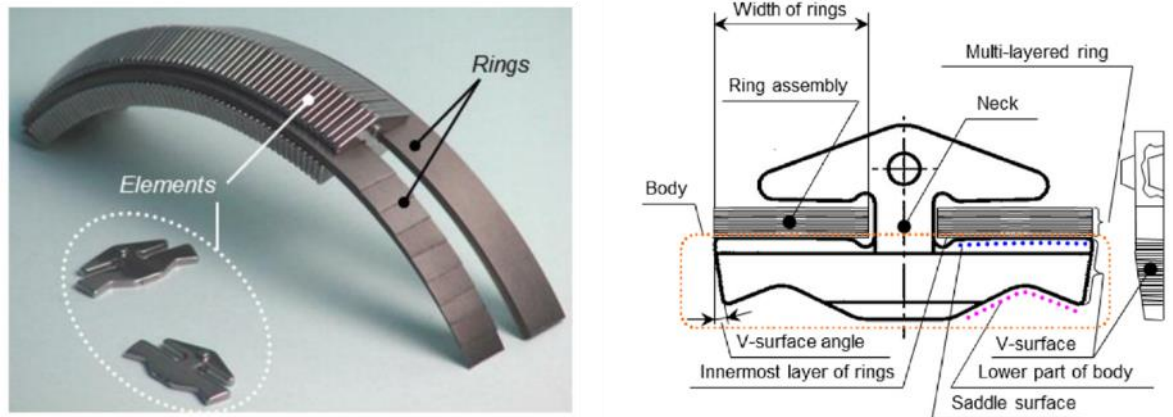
Configuration of elements and ring assembly of CVT steel belt
